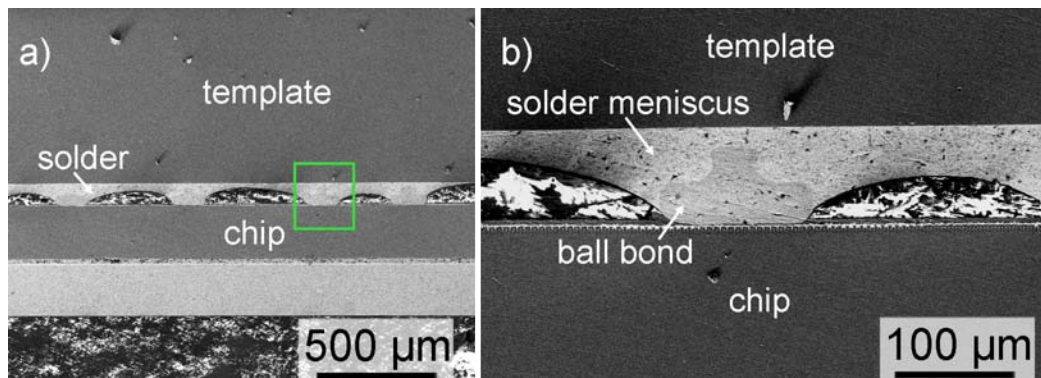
Cross section of flat solder template: (a) Overview of several ball bonds soldered in AuSn (b) close up of a soldered ball bond revealing a clear gap between pad metallization and solder.
